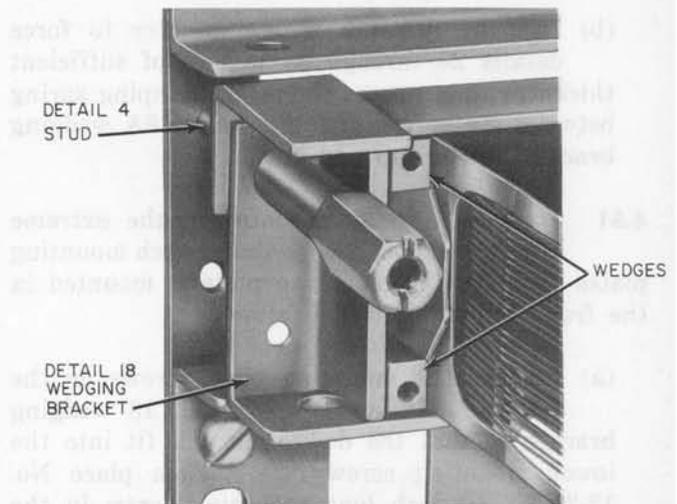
Detail 18 Wedging Support on Detail 4 Stud
